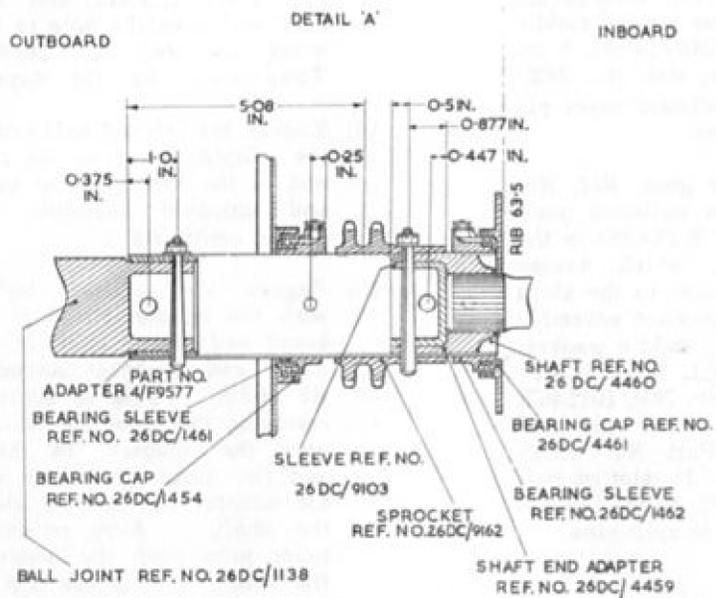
Air brakes sprocket and shaft assemblies (1)
